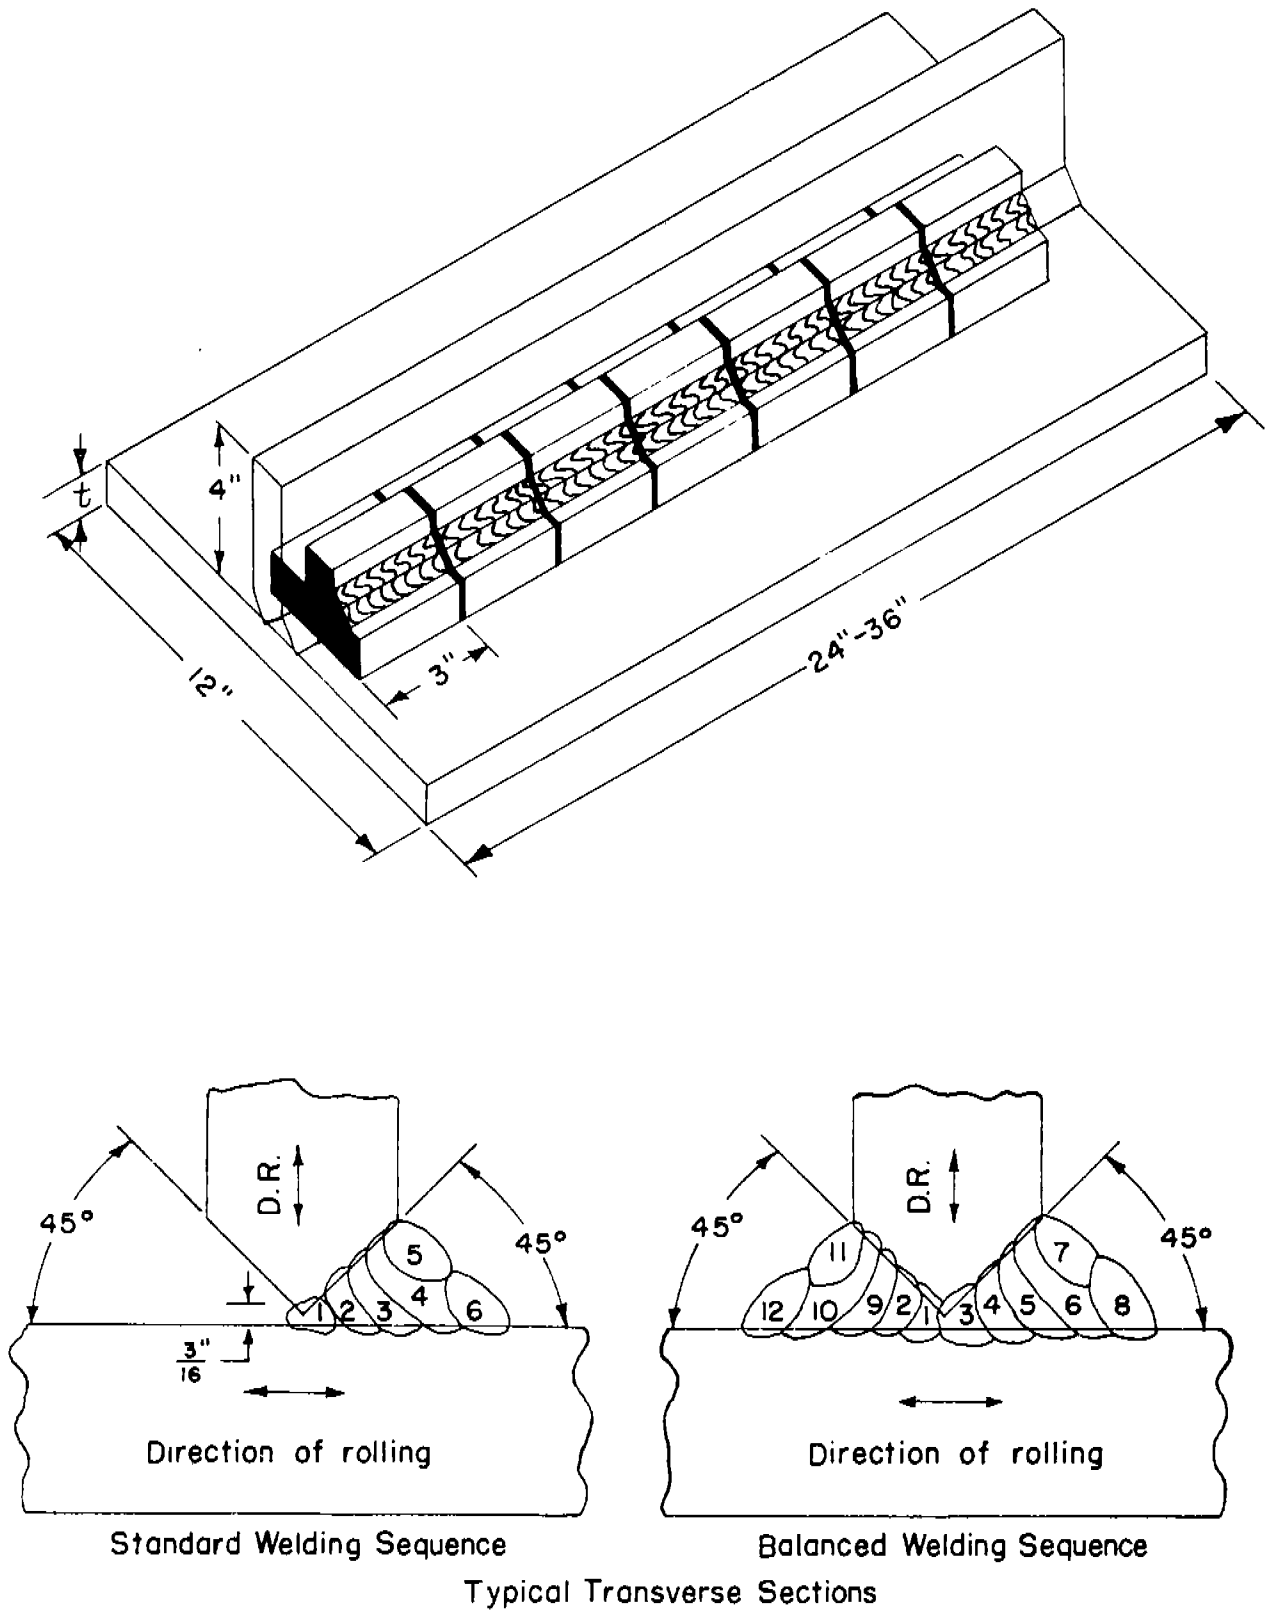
DETAILS OF TEE - JOINT SPECIMENS SHOWING LOCATION OF SECTIONS
